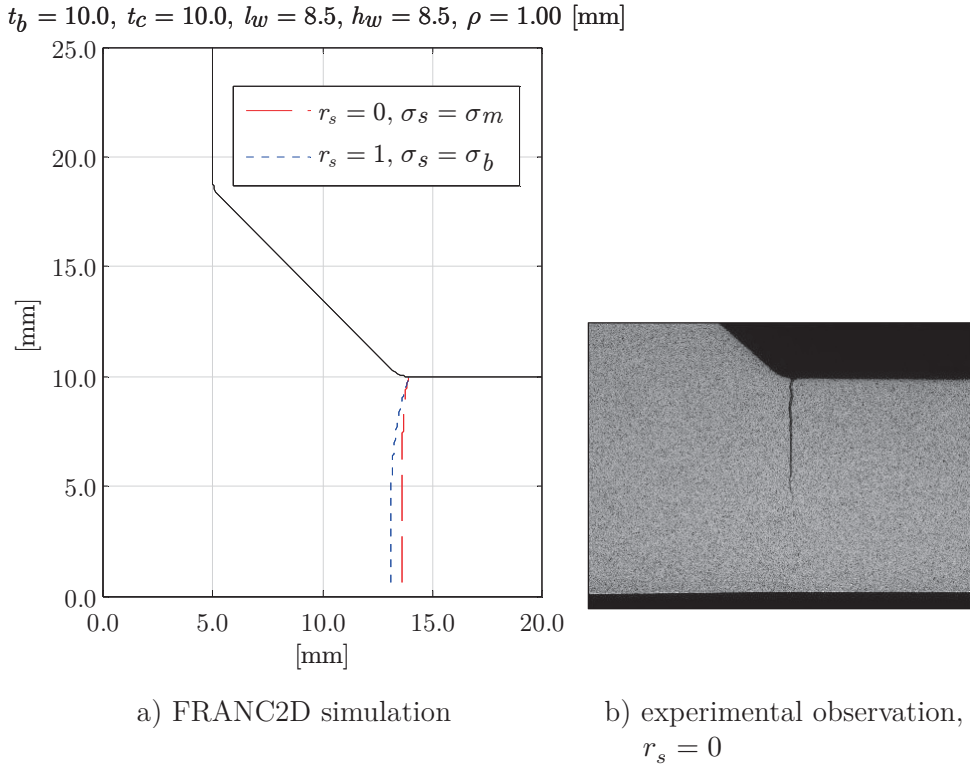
FP DS T-joint weld toe crack path similarity.
